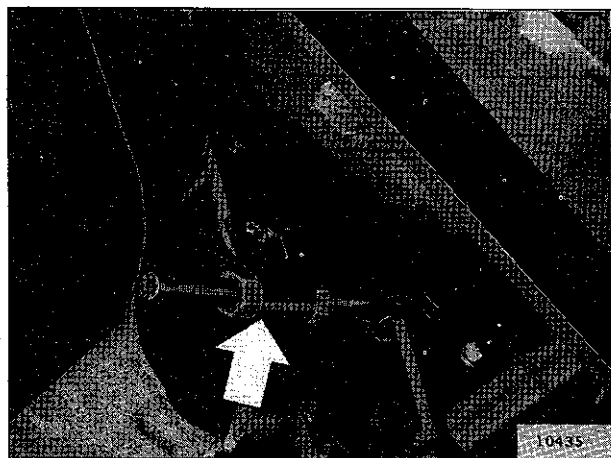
CLUTCH ADJUSTMENT—L6-226 MODELS
